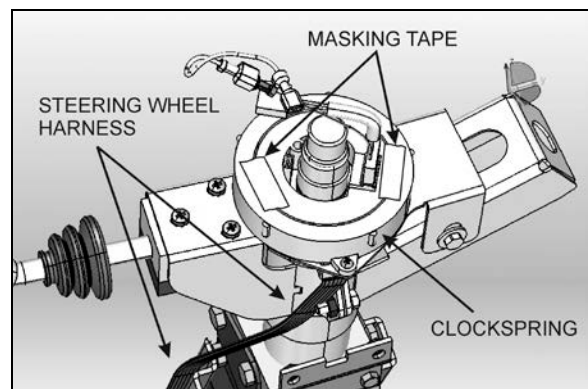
LOCKING THE CLOCKSPrING IN PLACE
